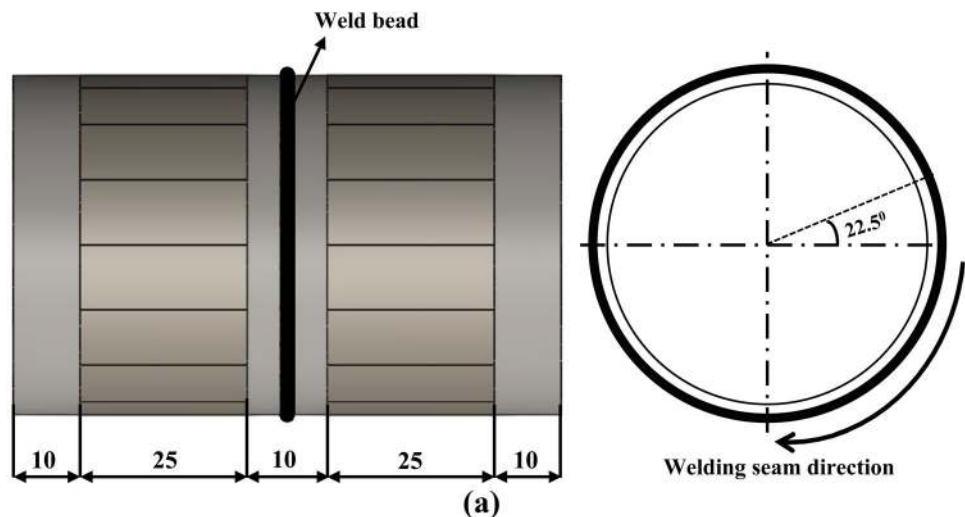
Cross section of TIG-welded specimens with and without trailing heat sink
